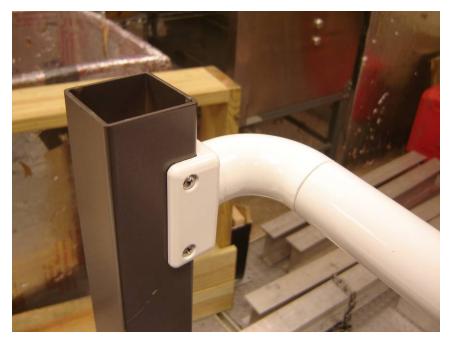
Quick Return Bracket and Big Post Adaptor
